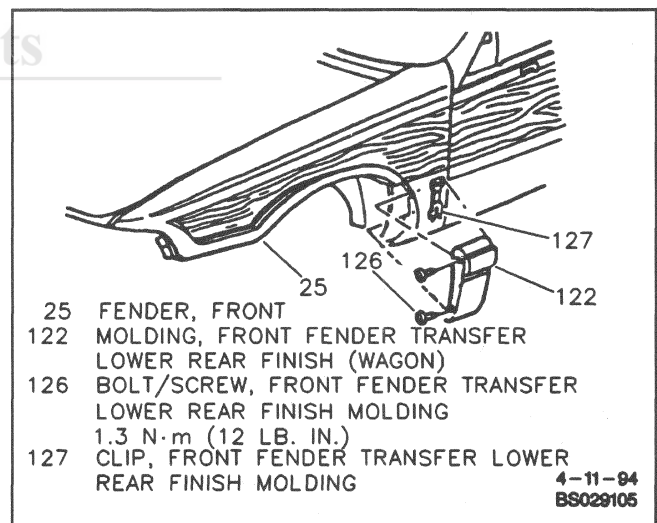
Front Fender Transfer Lower Rear Finish Molding-(Buick Wagon)
